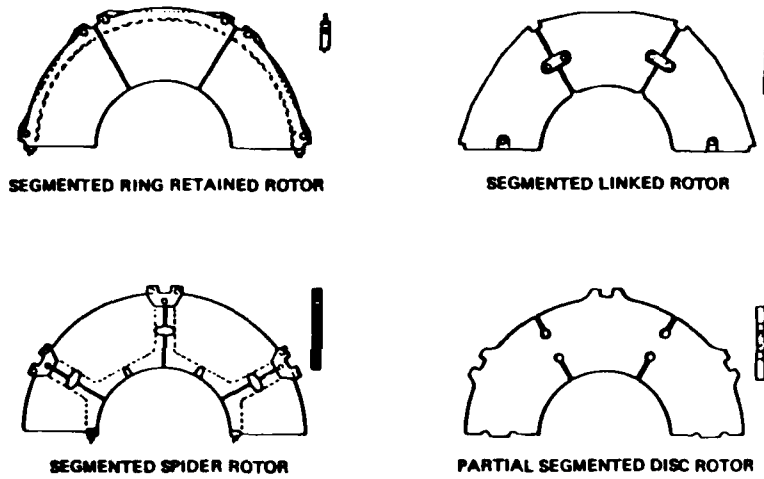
Various Types of Rotor Designs Used in Aircraft Brakes
